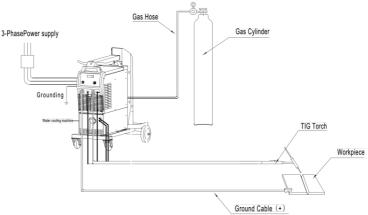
Water-cooling TIG welding (Combined one machine)
